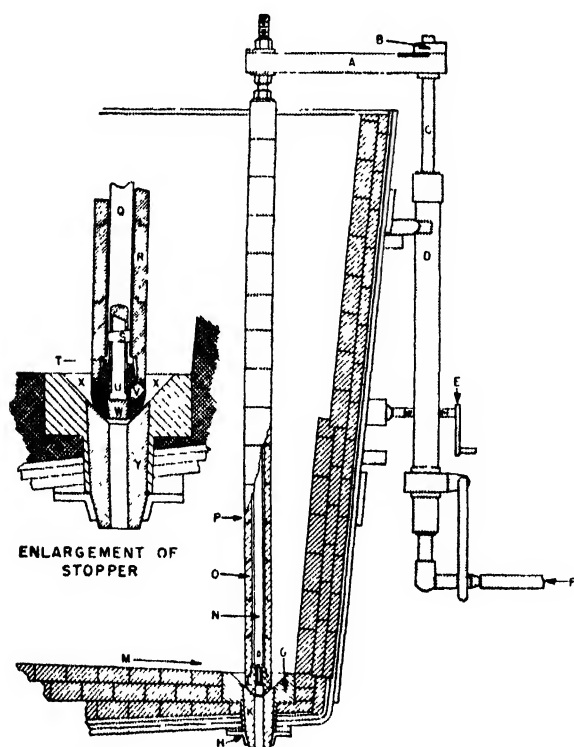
31. Stopper rod, well, and nozzle assembly for a modern steel ladle, indicating materials of construction and method of installation.
